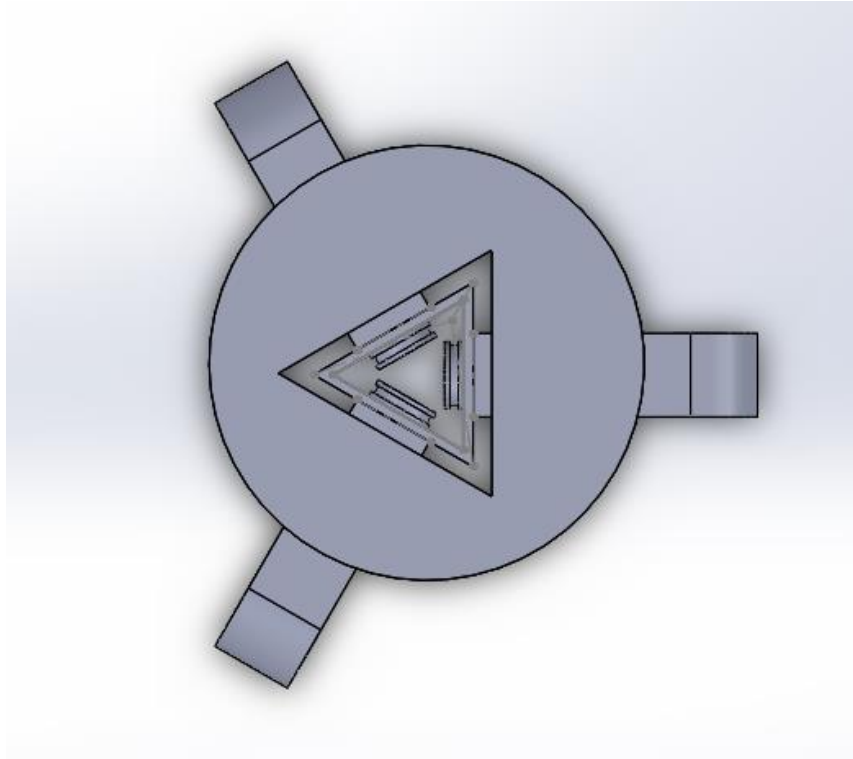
CAD Model of Prototype I without Wheels (Top View)
